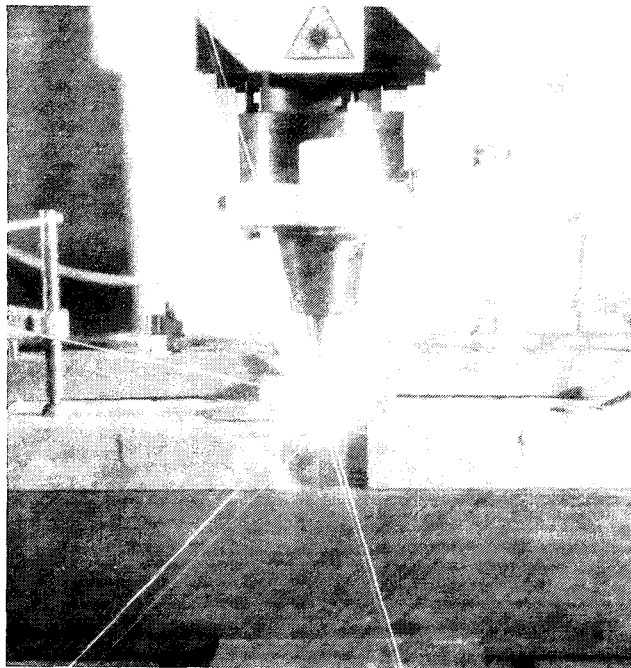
Thin sheet welding using CO₂ laser for lap joint in coated steel
